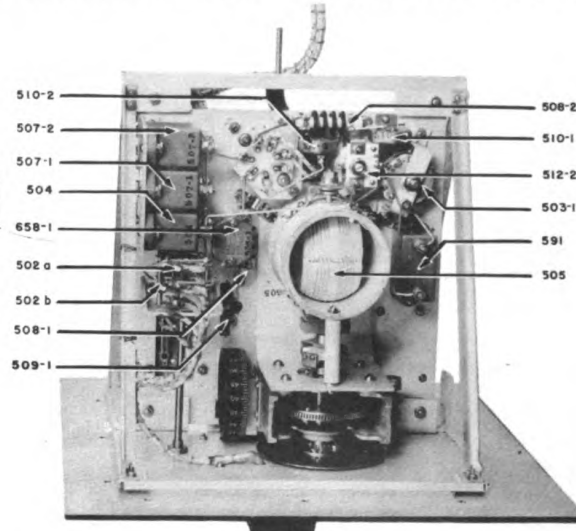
RADIO TRANSMITTER BC-325-B, BOTTOM VIEW OF OSCILLATOR
